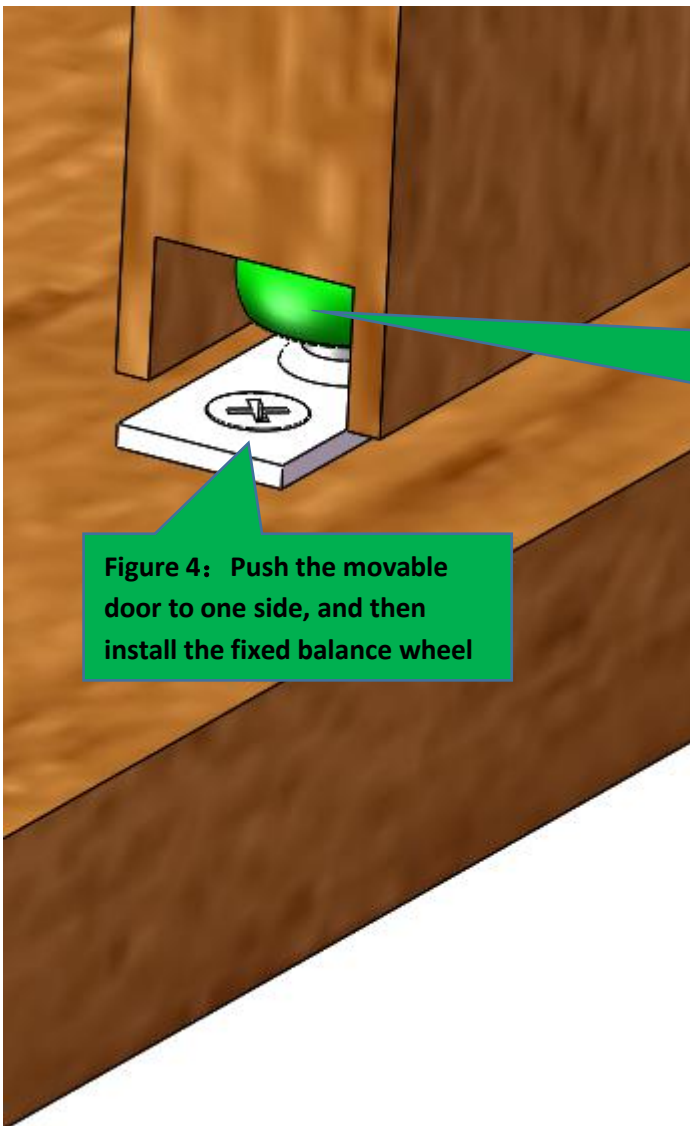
Push the movable door to one side, and then install the fixed balance wheel
